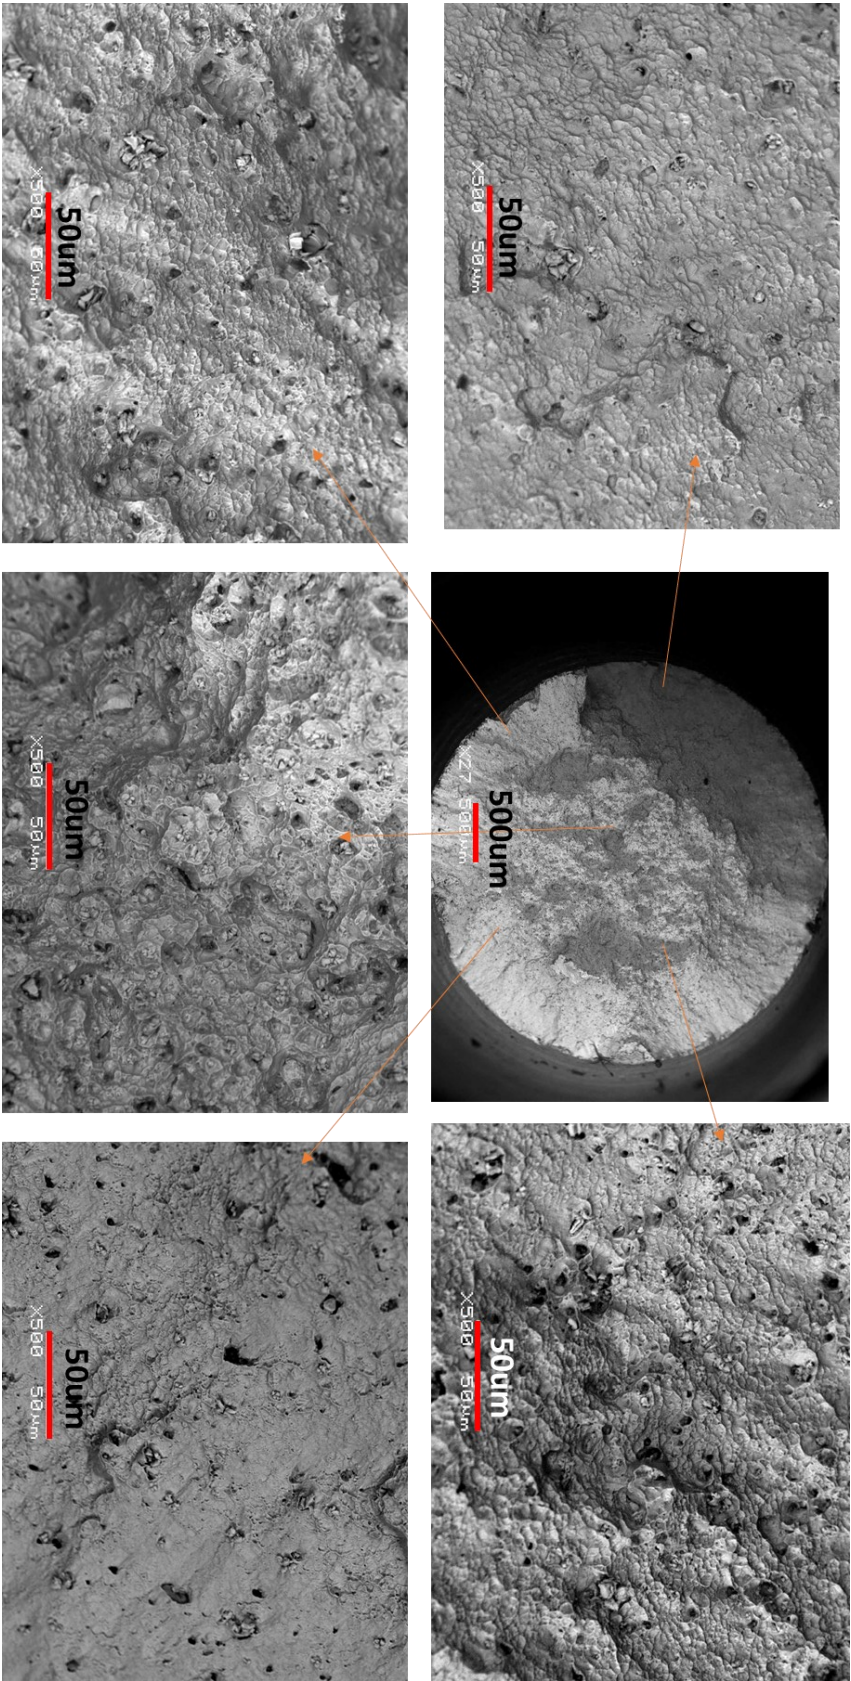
(a) Fracture surfaces of HT1P at different locations.
